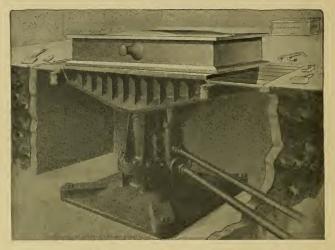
A Large, 42 x 97-inch, Plain Jolt-Ramming Moulding Machine, showing Section through Foundation and Pit.
